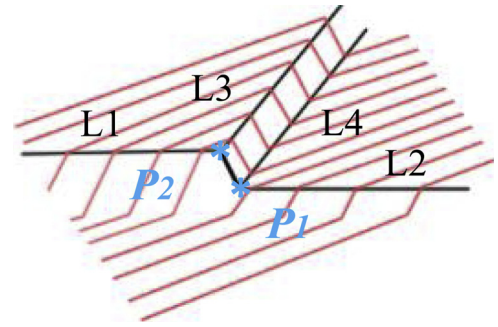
Weld start and end points detection model of lap joint.
